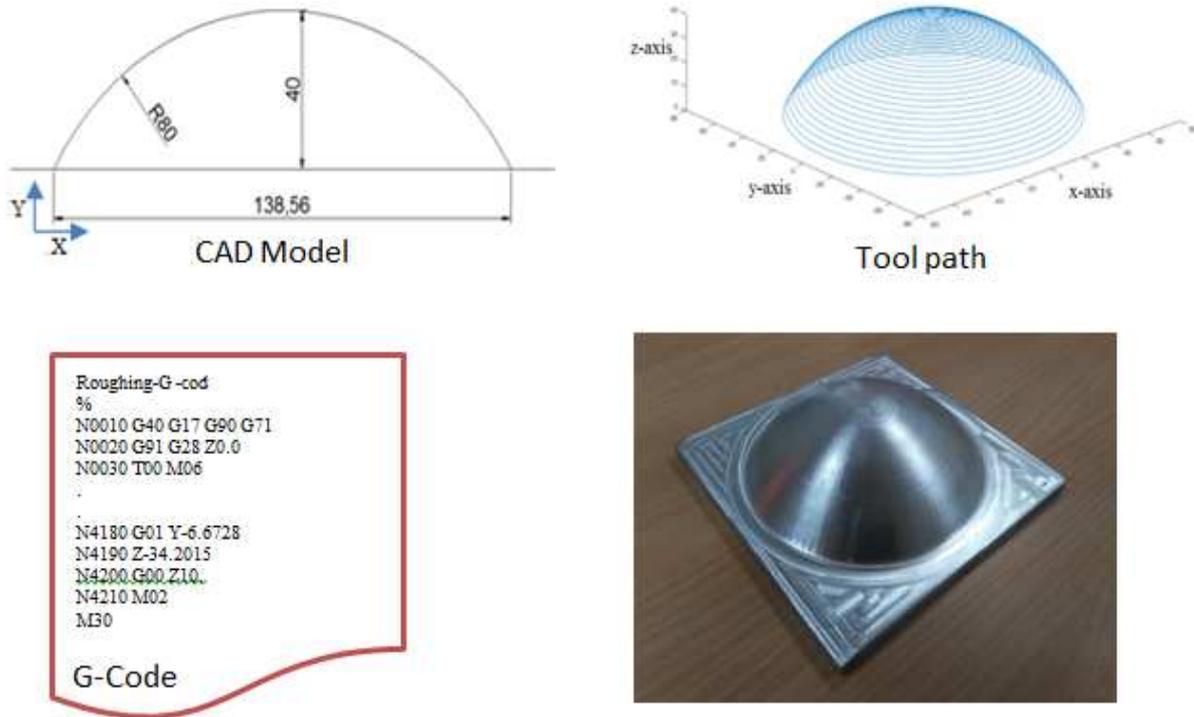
Geometry of part and CNC-part program. (all dimension in (mm)).
